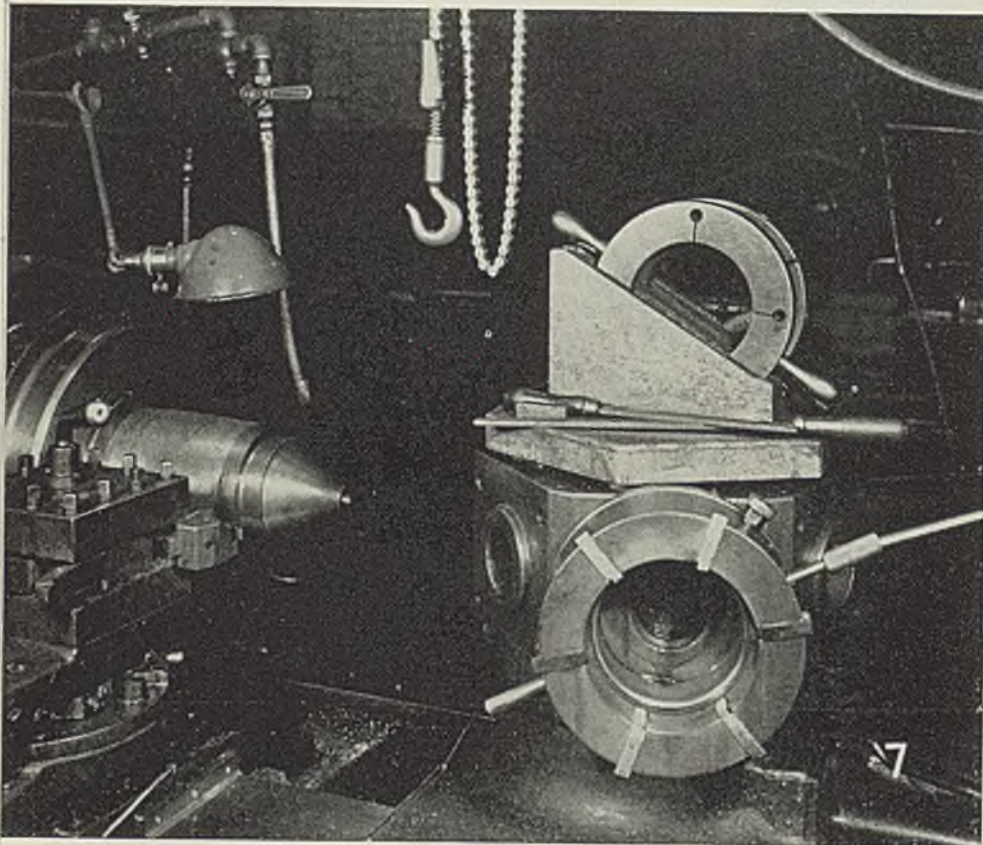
With the rear end of the shell completed, it is transferred to this turret lathe for front-end finishing. While held in a collet chuck and supported by a center carried in the lathe turret, the front end is undercut. Note the several tools on the cross slide turret. Next it is threaded to accommodate the windshield or nose of the finished shell, using the thread chaser mounted on the main turret at right, which also carries the center used in undercutting. The front end of the shell is shown here after these operations have been completed. Hook for hoist can also be seen
